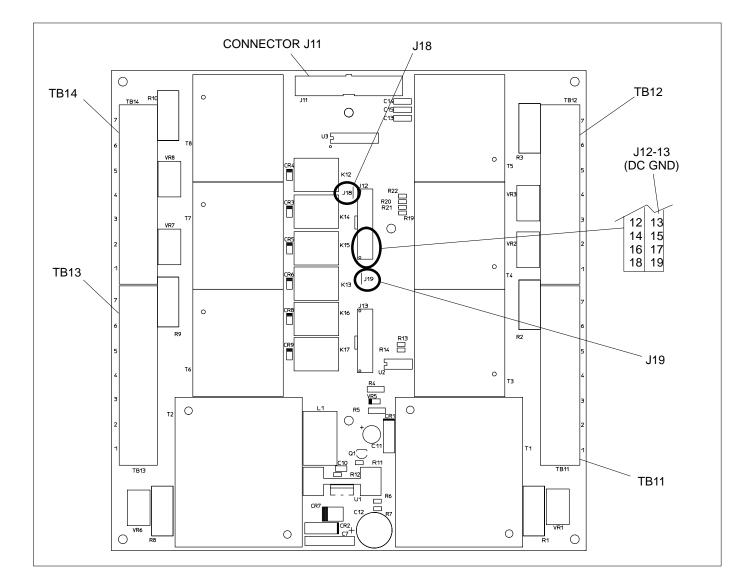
POWER MODULE 1 PCB COMPONENT LOCATIONS
